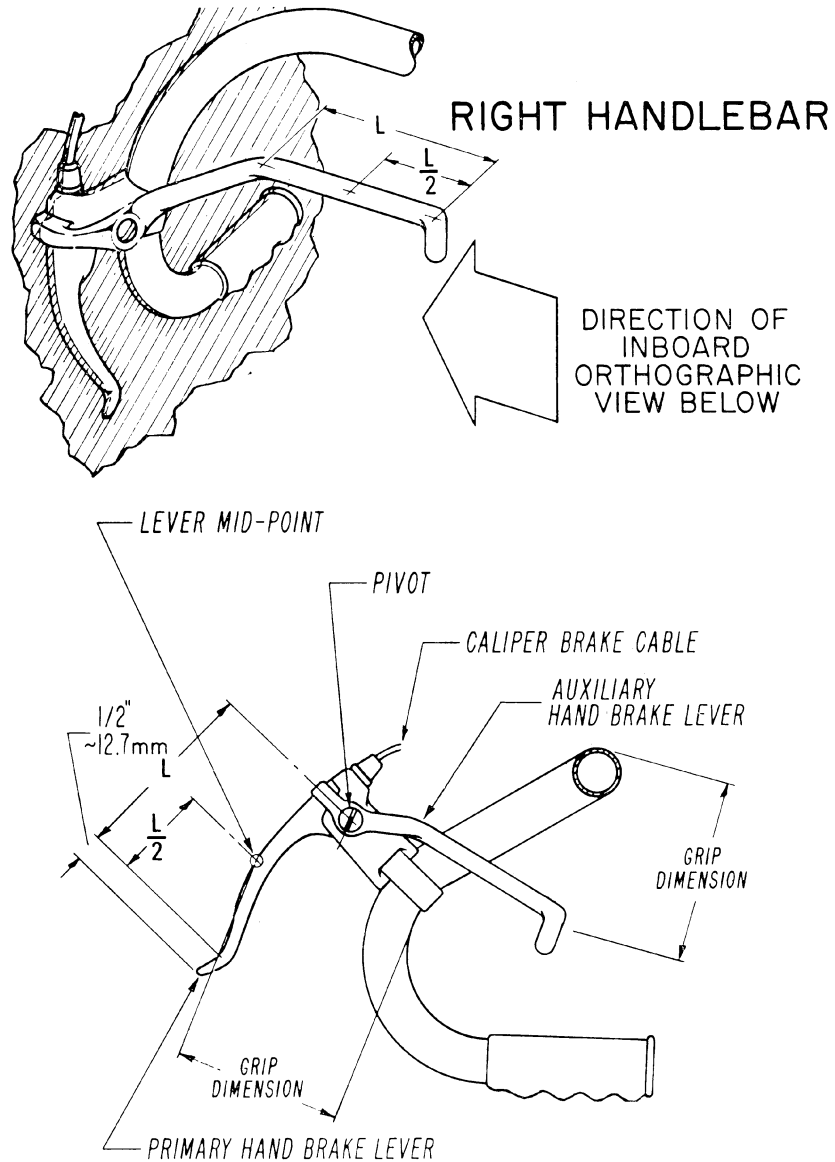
TYPICAL HANDBRAKE ACTUATOR SHOWING GRIP DIMENSION
